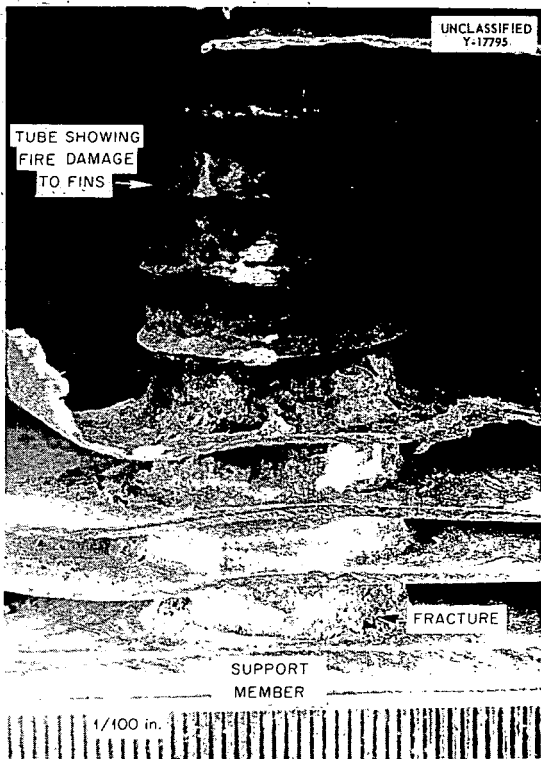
Failed Tube (C-1) from PWA No. 2 as Viewed from the Support-Member Side of the Radiator After Removal of Support Plate.
